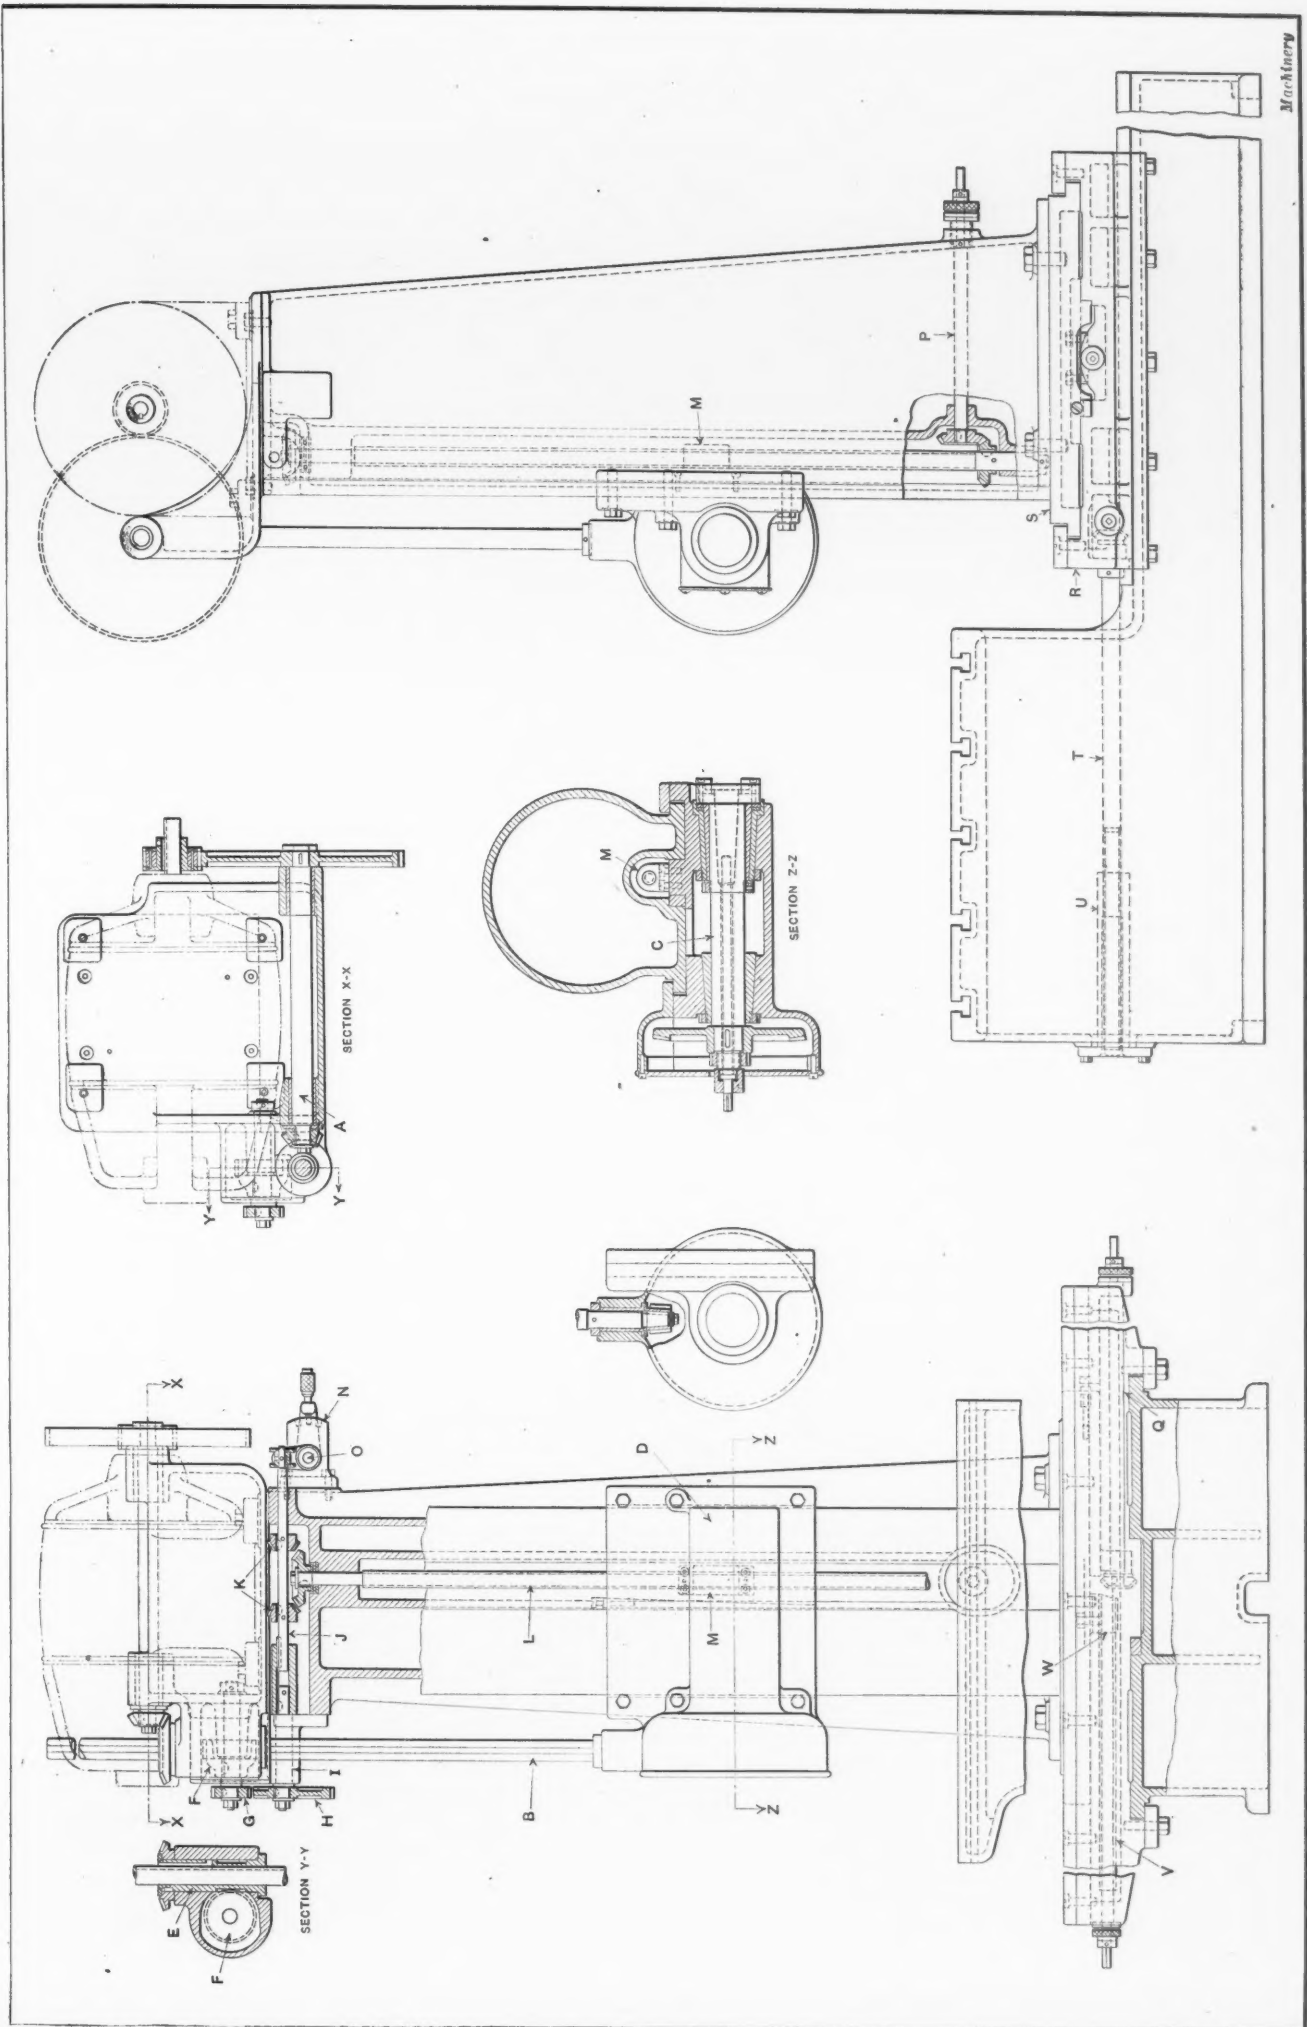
Assembly Drawing of Sawing Machine shown in Heading Illustration
